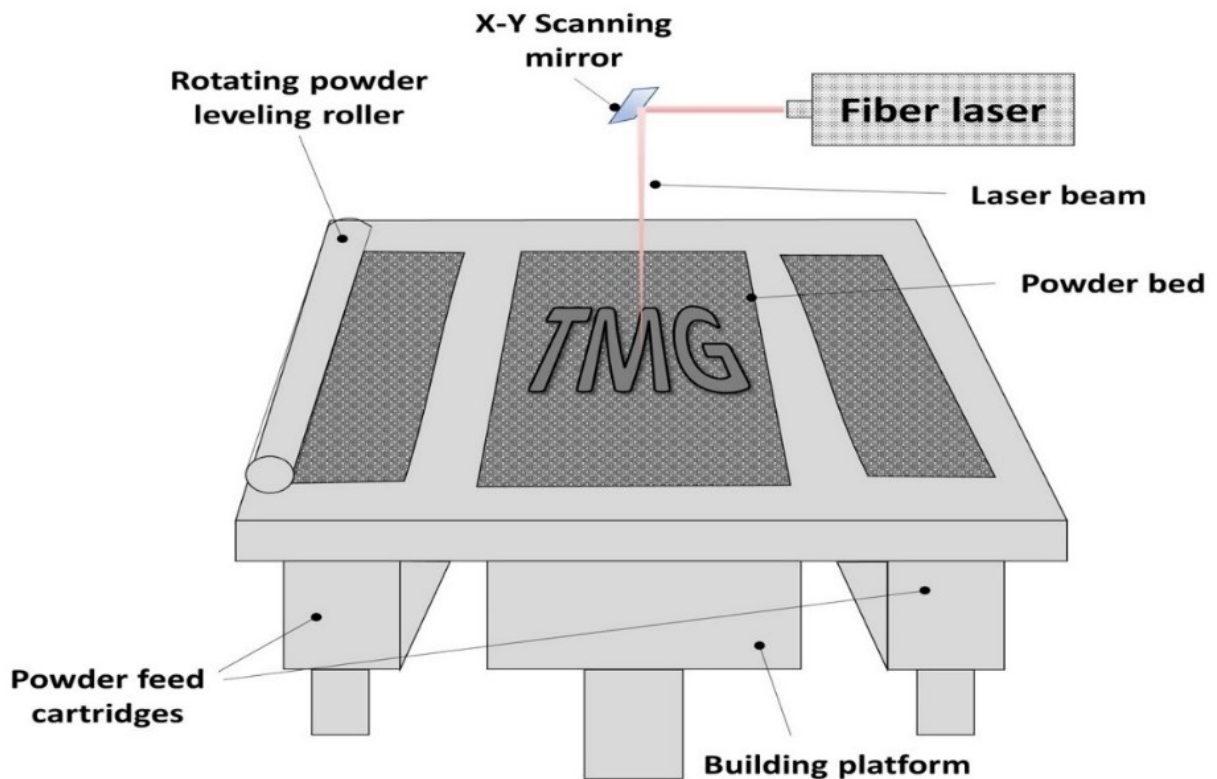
Schematic drawing of the laser powder bed fusion process (redrawn from [39]).
